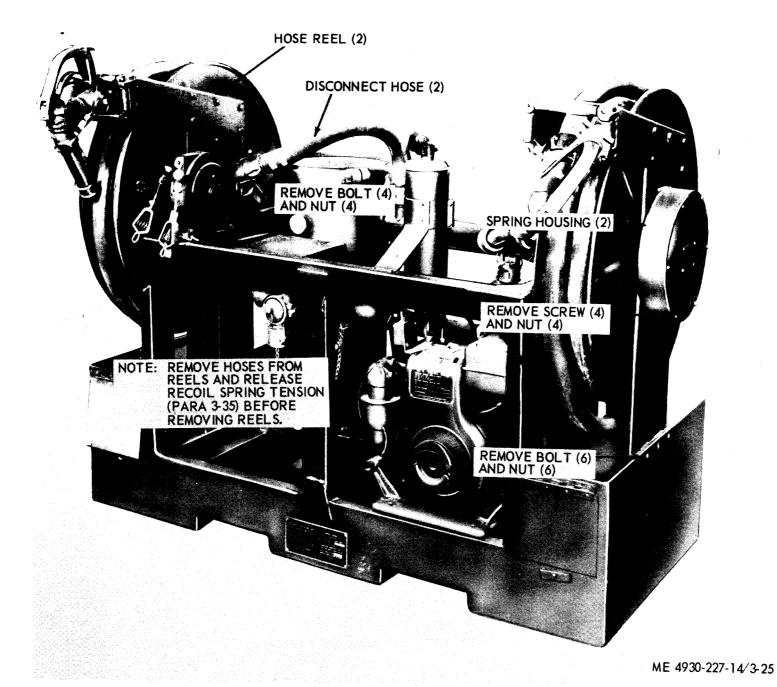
Hose reels and spring housings assembly, removal and installation.
